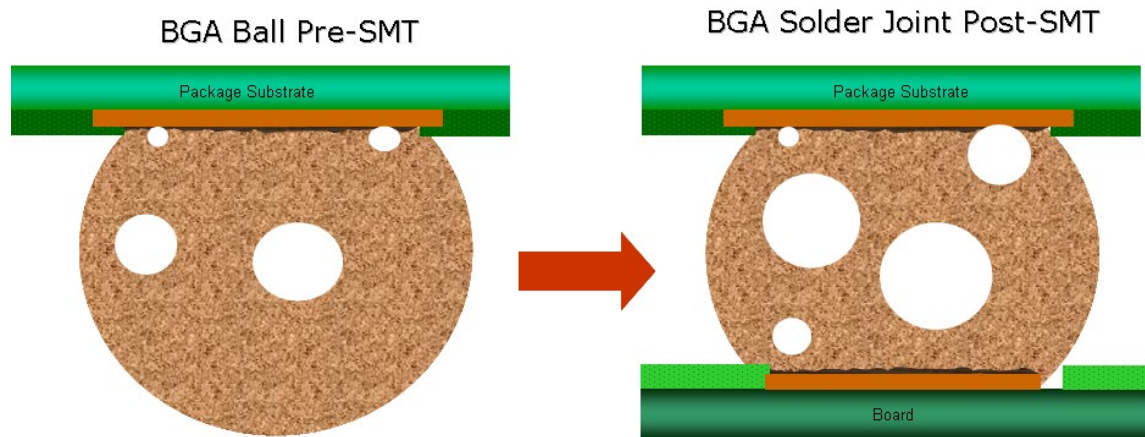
Illustration of the Solder Ball Void Change During SMT Soldering Process - Package to Board
